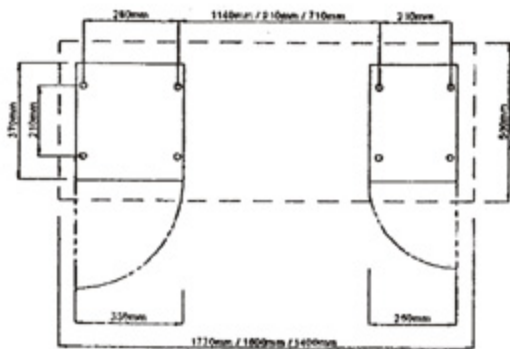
Fixing dimensions for lathe's stand cabinet
